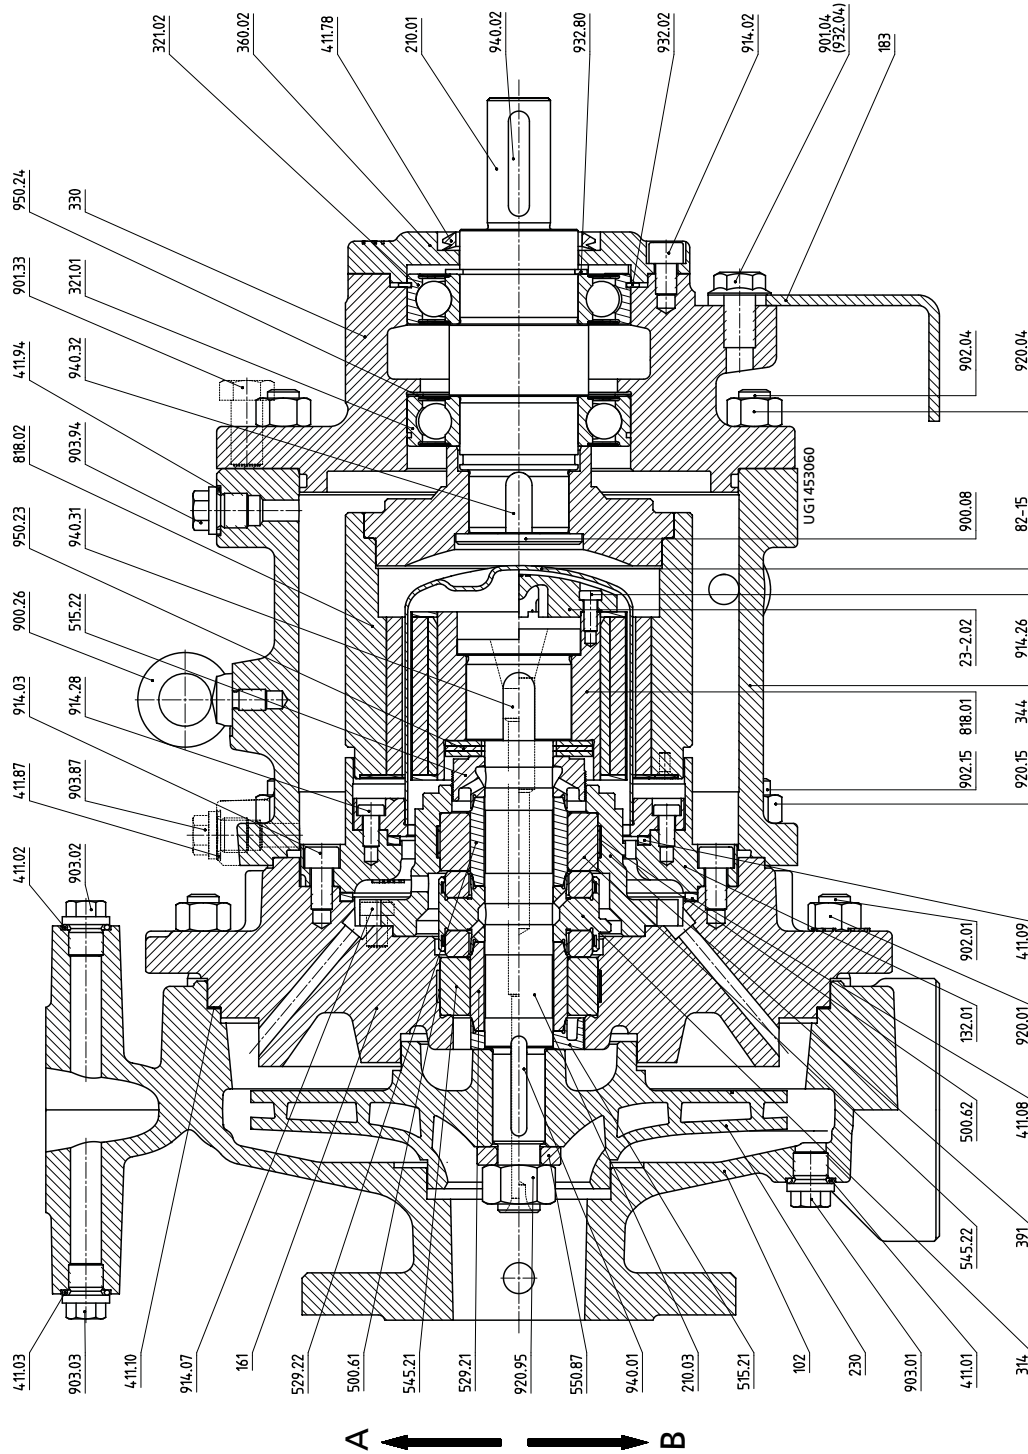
General assembly drawing of model with bolted cover, with intermediate piece
